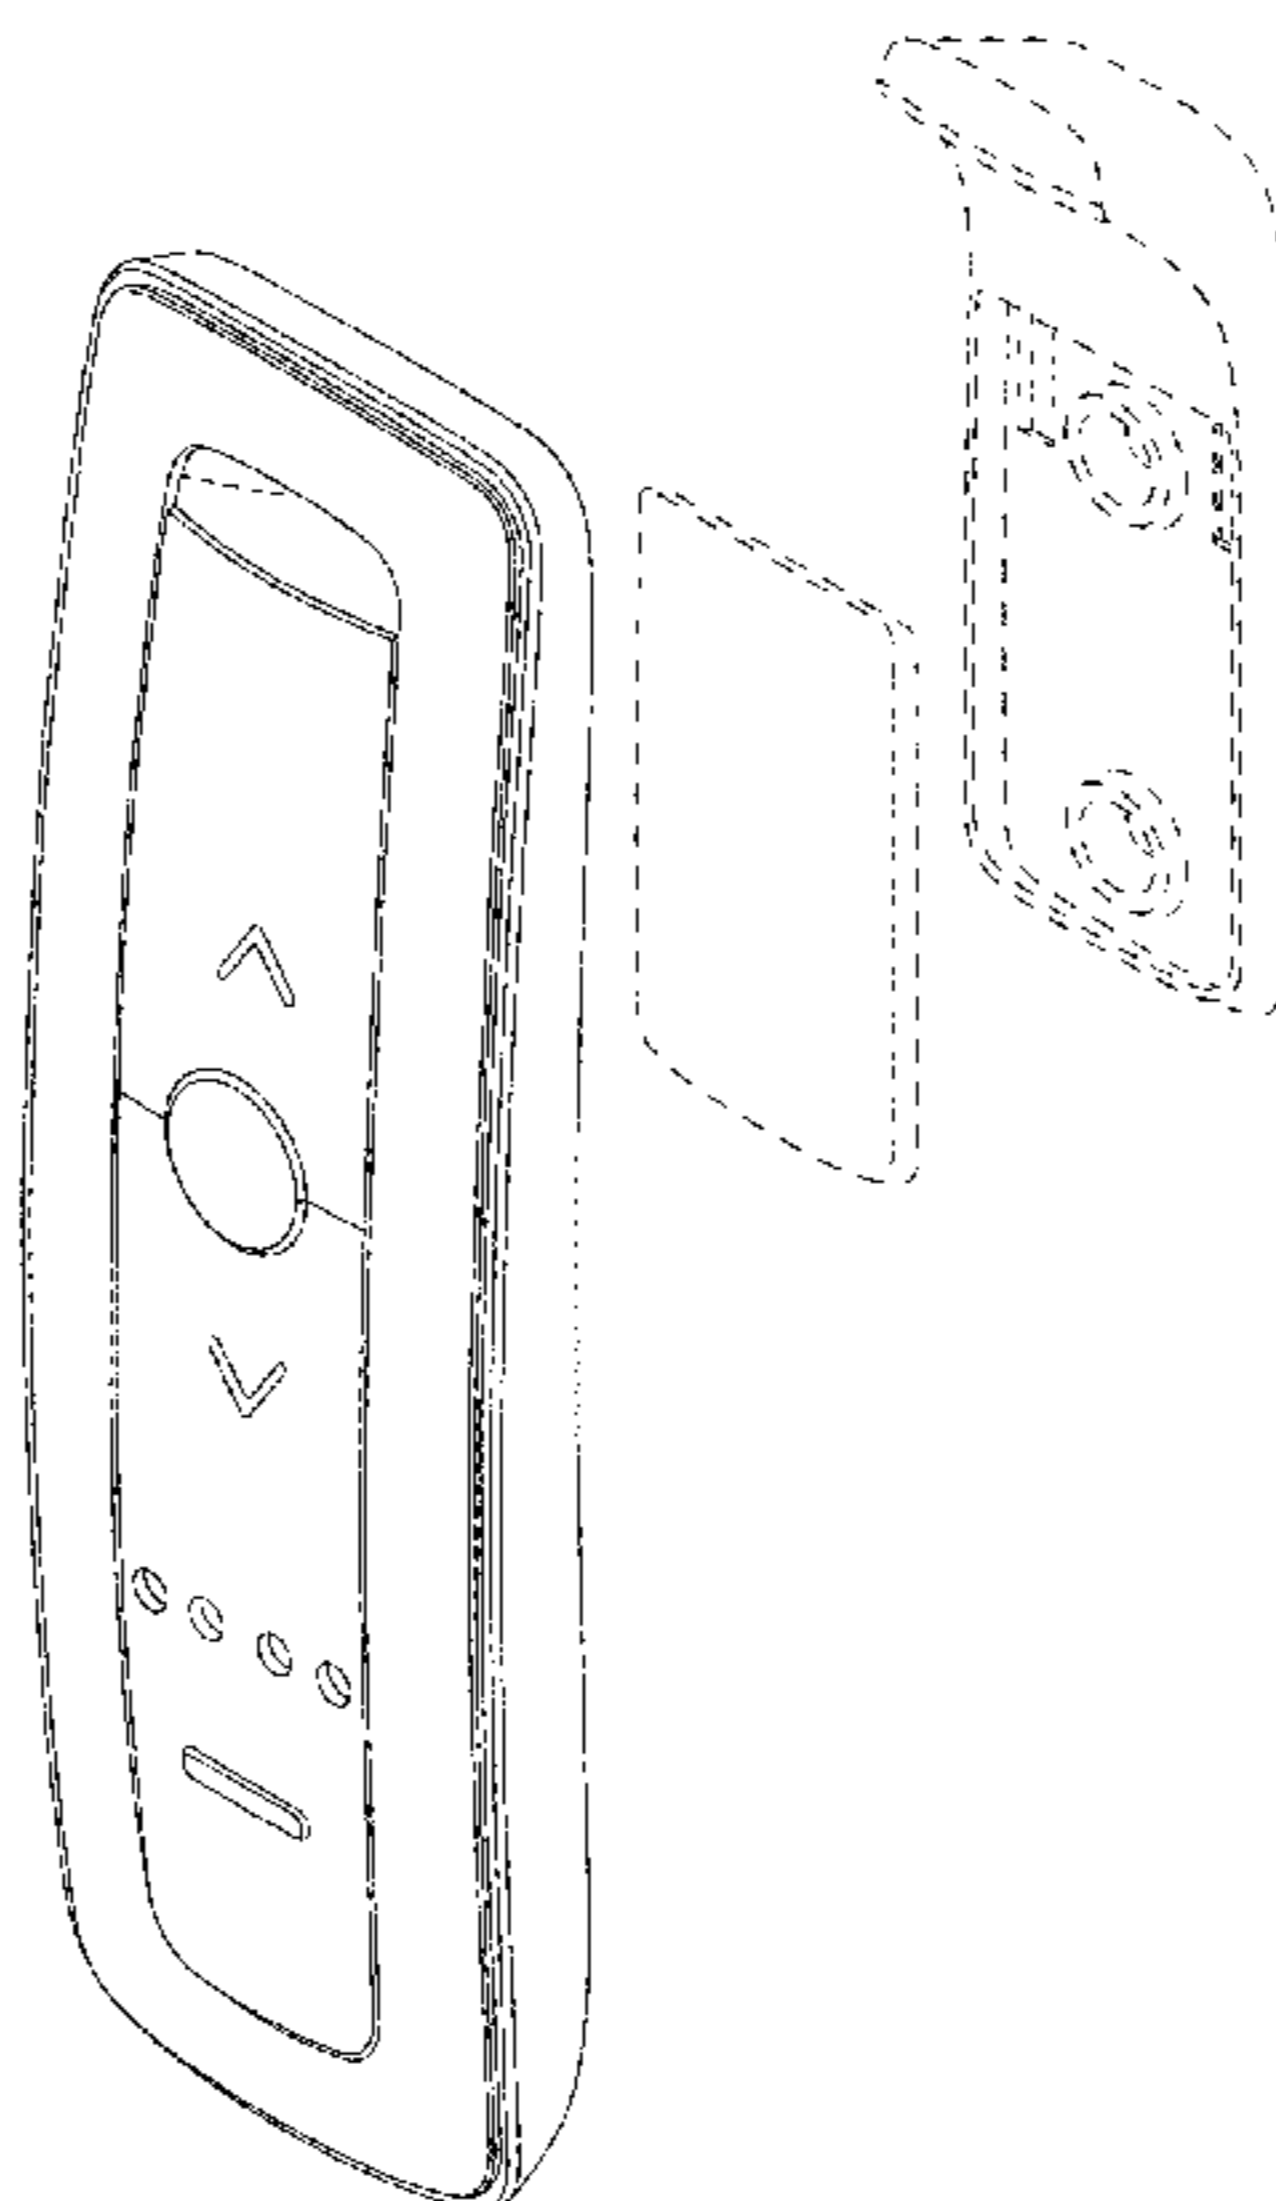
is a perspective exploded view of a remote control according to our invention;
